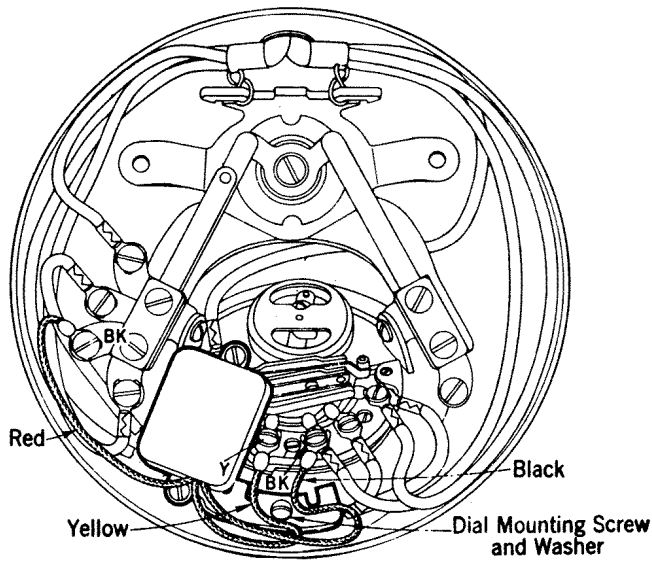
61B Filter Shown in 51-Type Desk Stand
